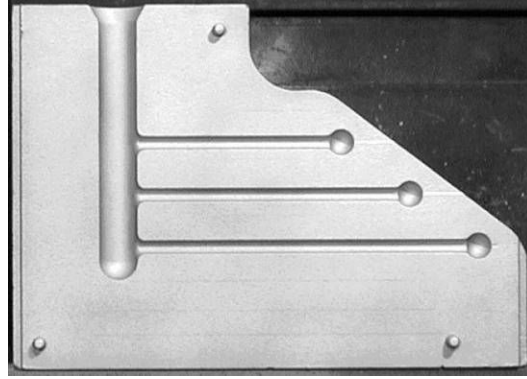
I-beam Mould to Examine Hot Tears [49]
